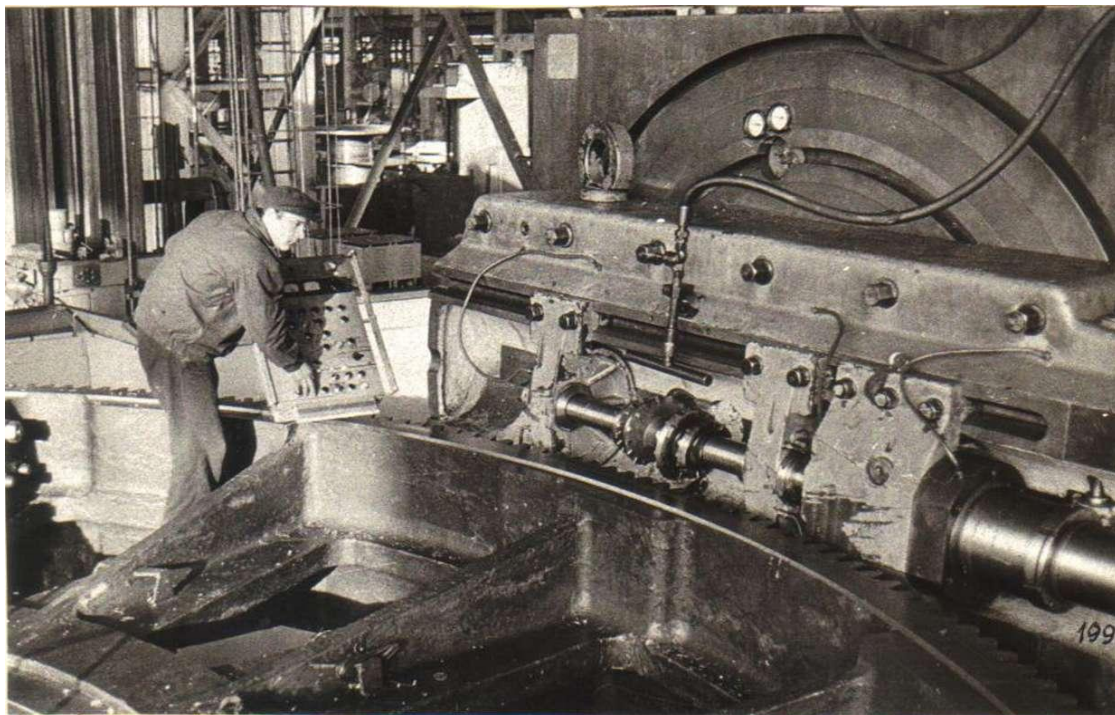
Finish cutting the worm and reconditioned large gear rim ($m = 28$; $z_k = 284$) with the use of the gear hobbing machine of KY-306 model
